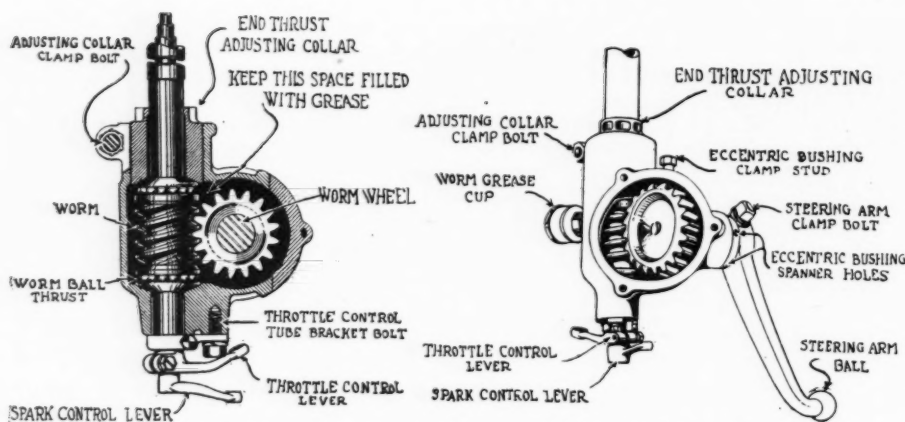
How wear is taken up in the steering gear of the Overland 90. Generally all the wear can be eliminated by adjusting the eccentric bushing
